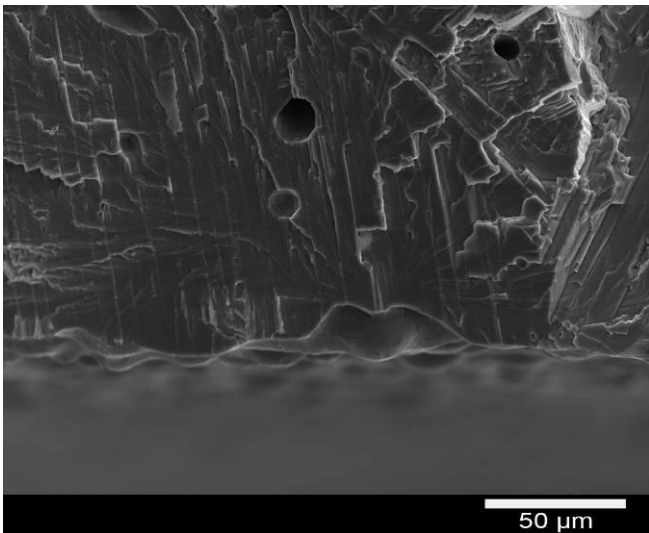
Typical fracture surface of MIM35H samples.
